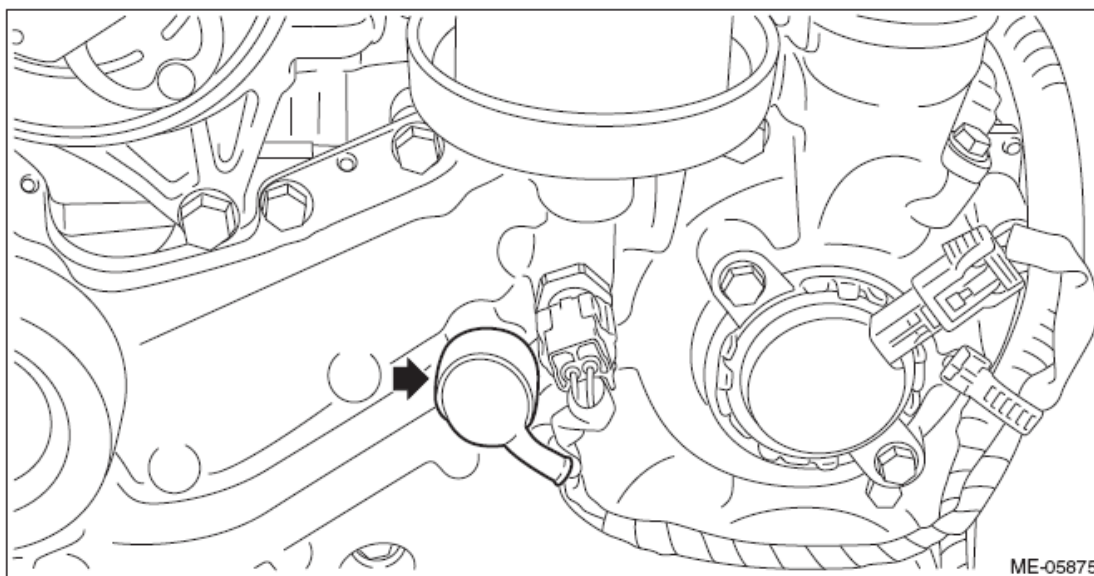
Locating Oil Pressure Switch Rubber Cap
